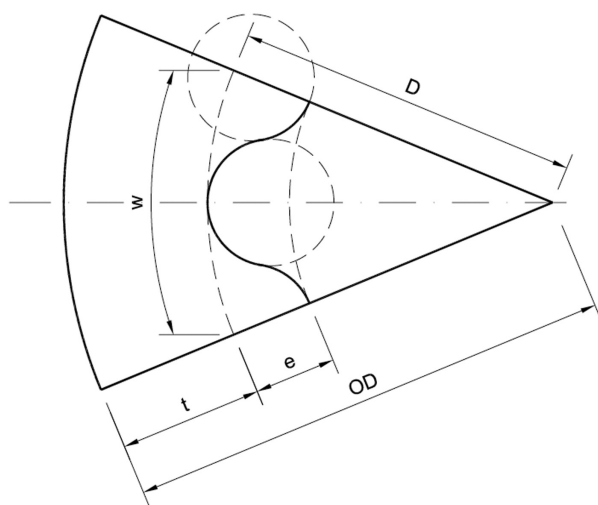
Part of the cross-section of a finned tube; OD: outer diameter, D : inner diameter, w : fin width, e : fin height, and t : minimum metal thickness.
